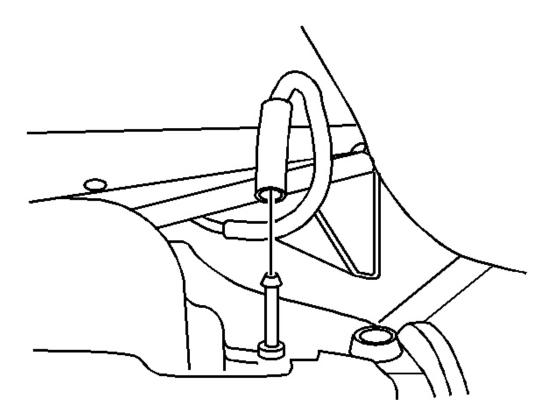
Vent Hose Removed From Rear Axle Courtesy of GENERAL MOTORS CORP.
